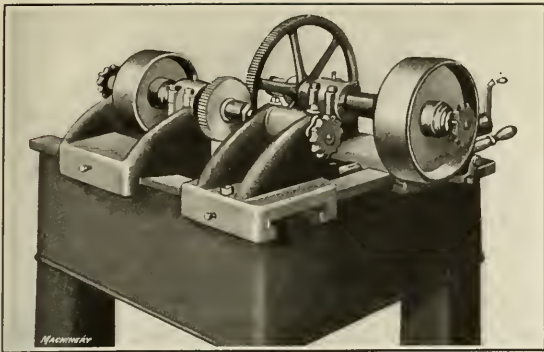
Fixture for testing Spur Gears for Noise under Load
